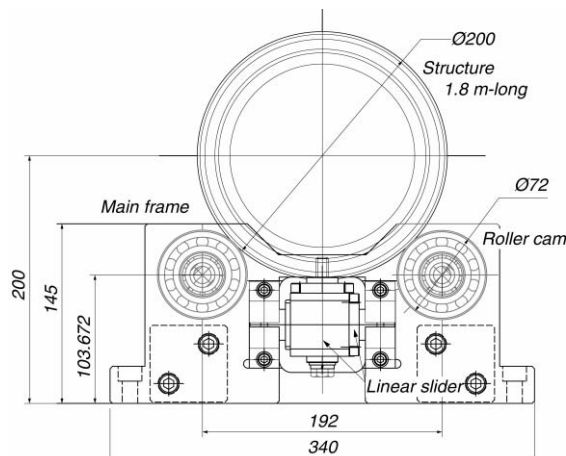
A cutaway drawing of the roller cams mover unit. 72 mm diameter roller cams give an adjustable range ± 1.4 mm.
